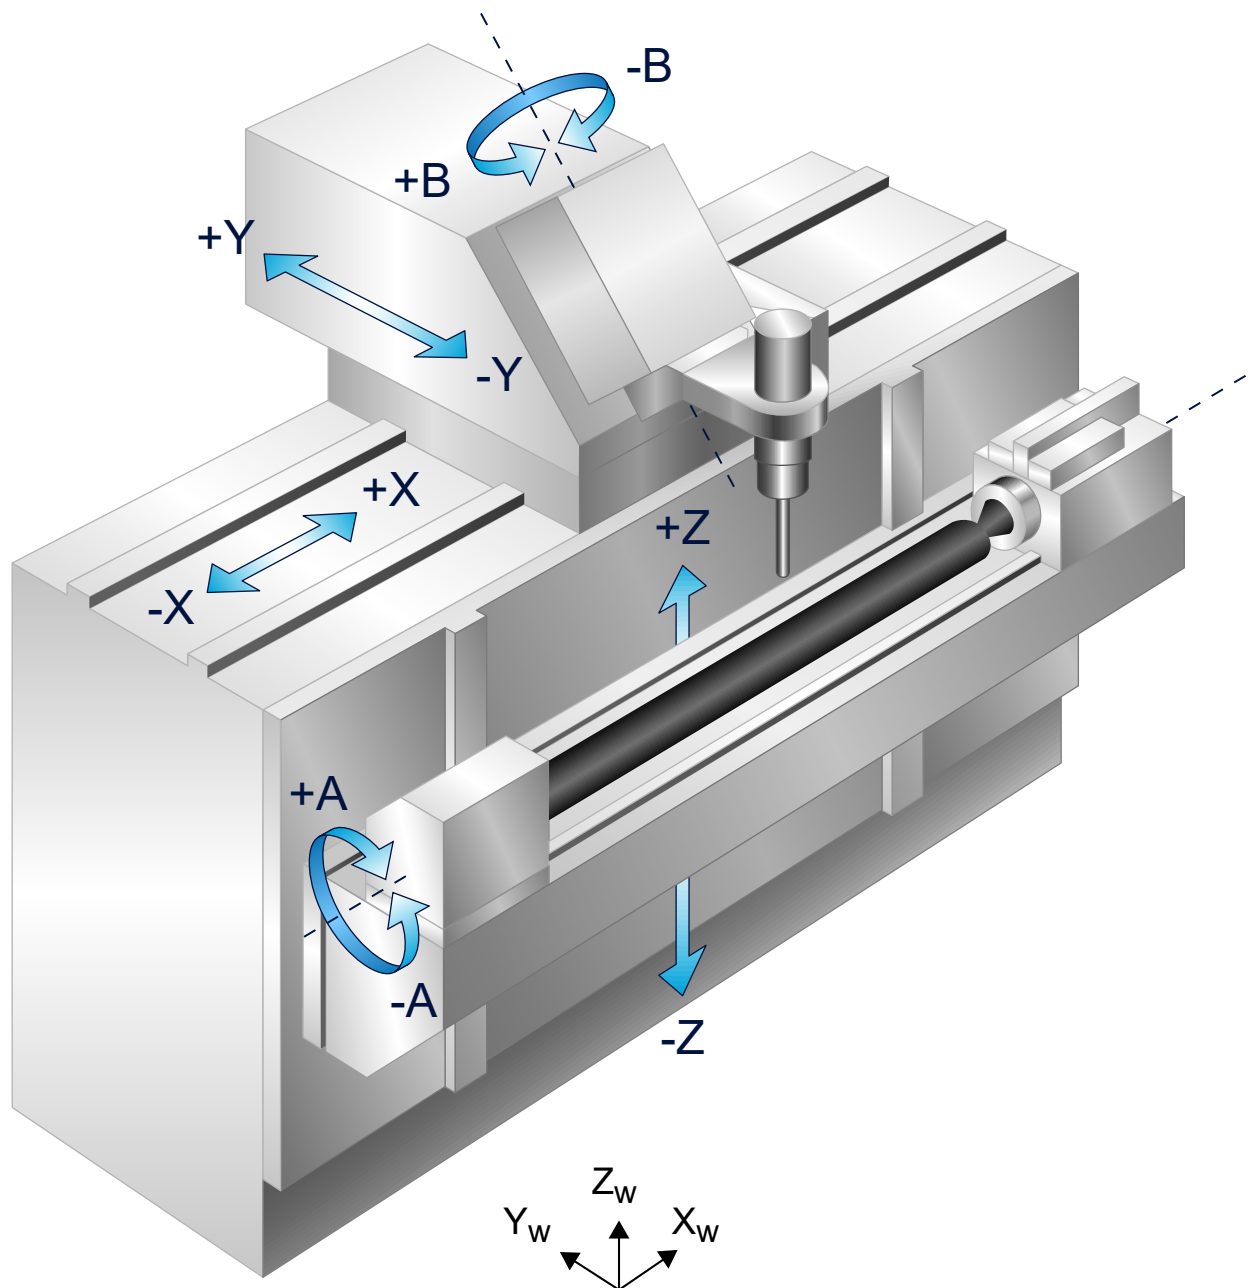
Axis configuration of the 5-axis machine with oblique angle head
